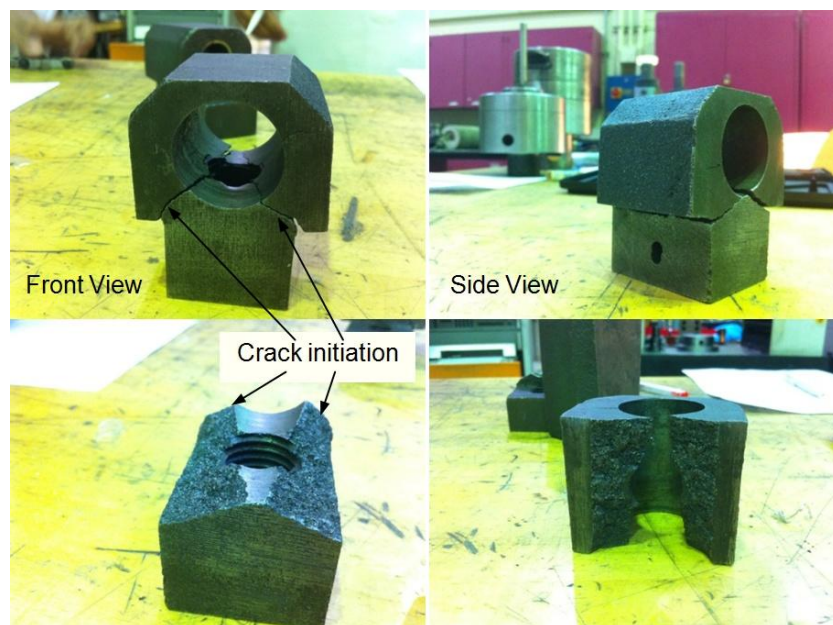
Stationary vise jaw shown the location of crack initiation
